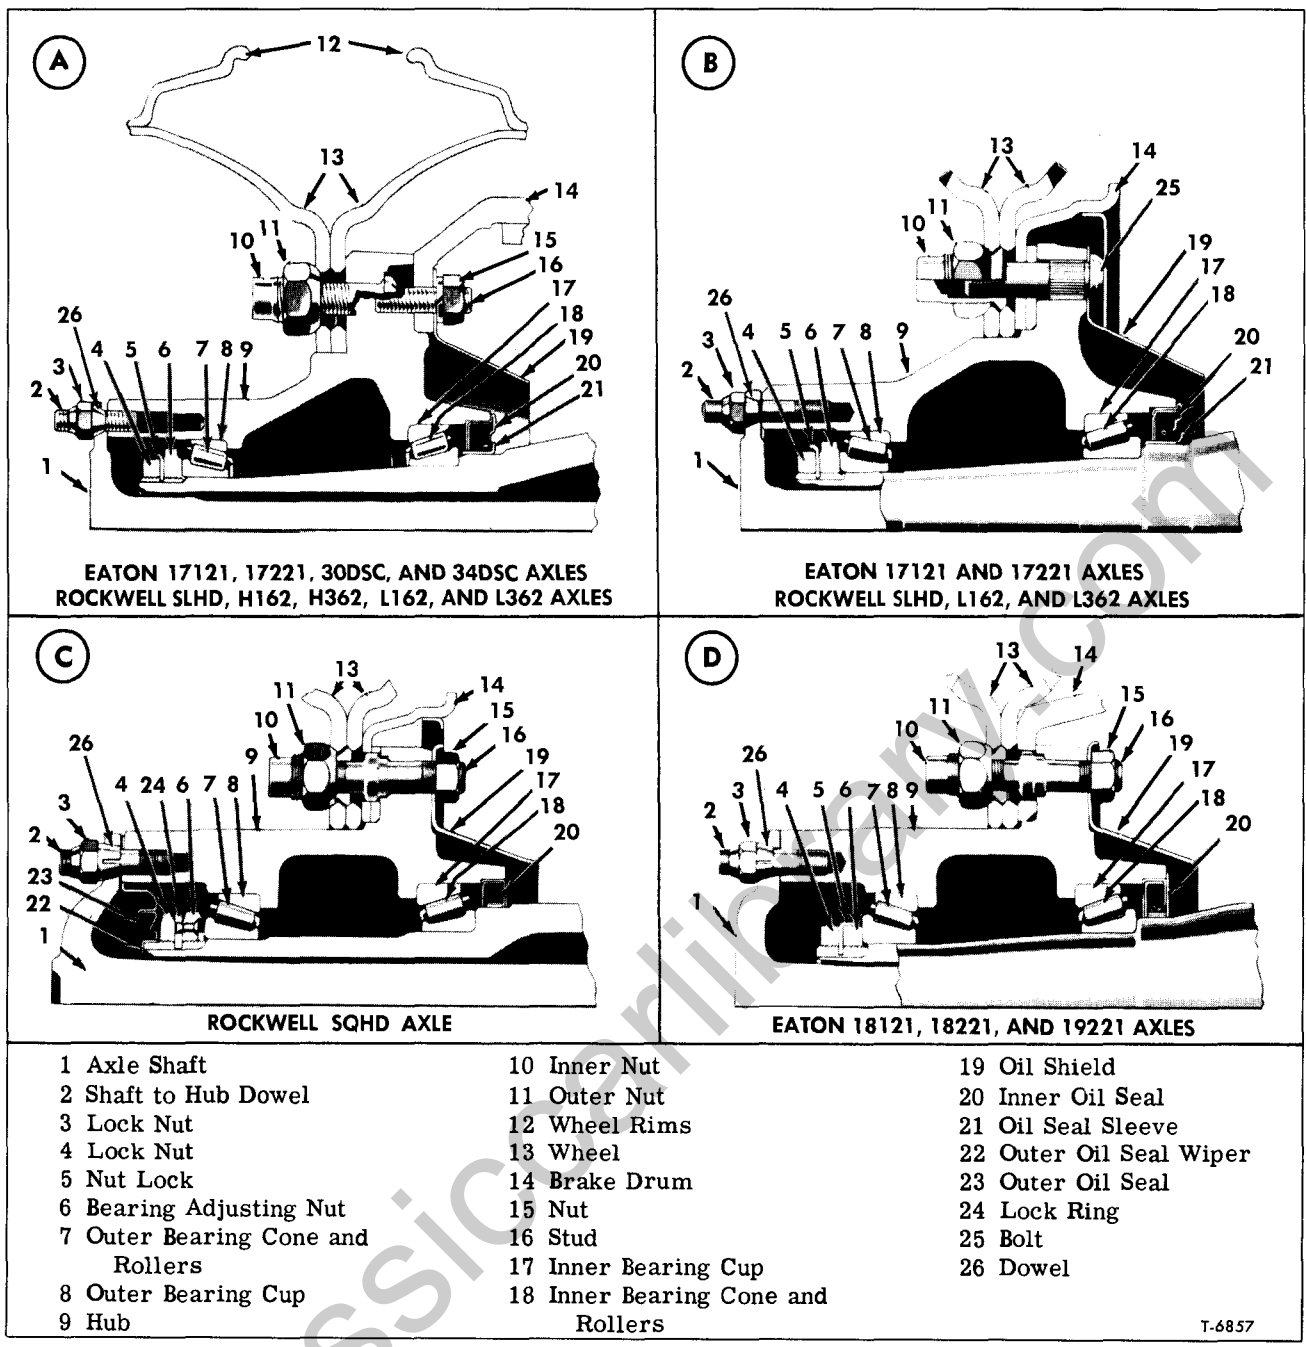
Rear Hubs and Bearings (with Disc-Type Wheels)
